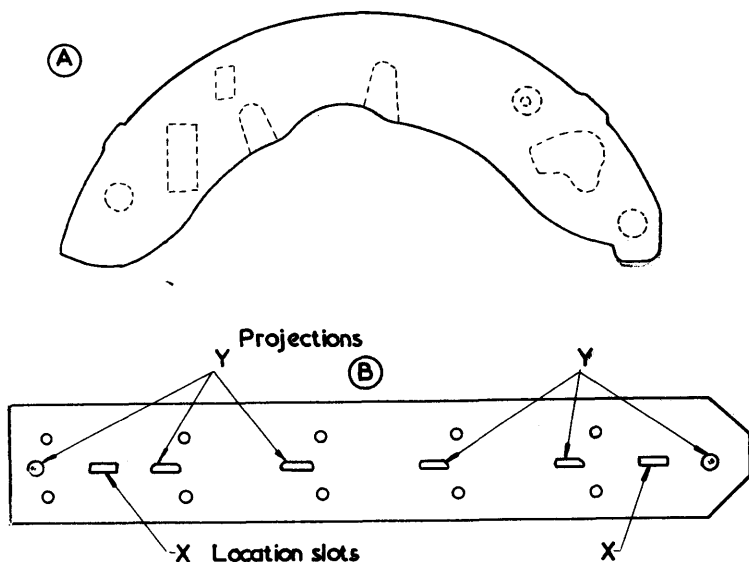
Mild-steel Pressings for Brake Shoe.
